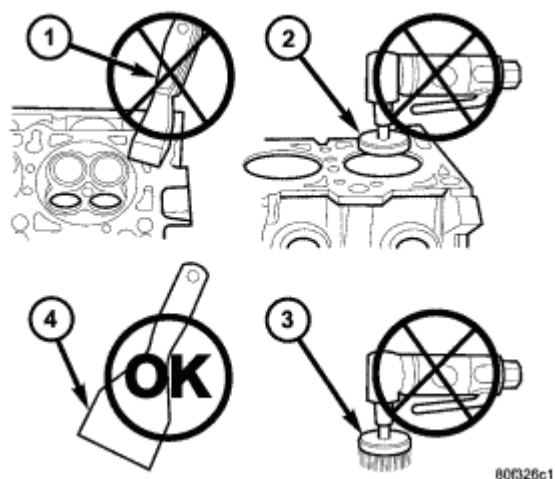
PROPER TOOL USAGE FOR SURFACE PREPARATION
